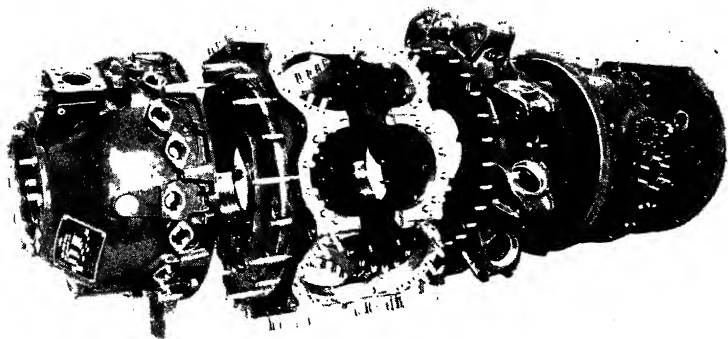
Exploded view of Wright Cyclone engine crankcase sections showing forged aluminum-alloy nose piece, forged main section, cast blower section, and cast rear section.
